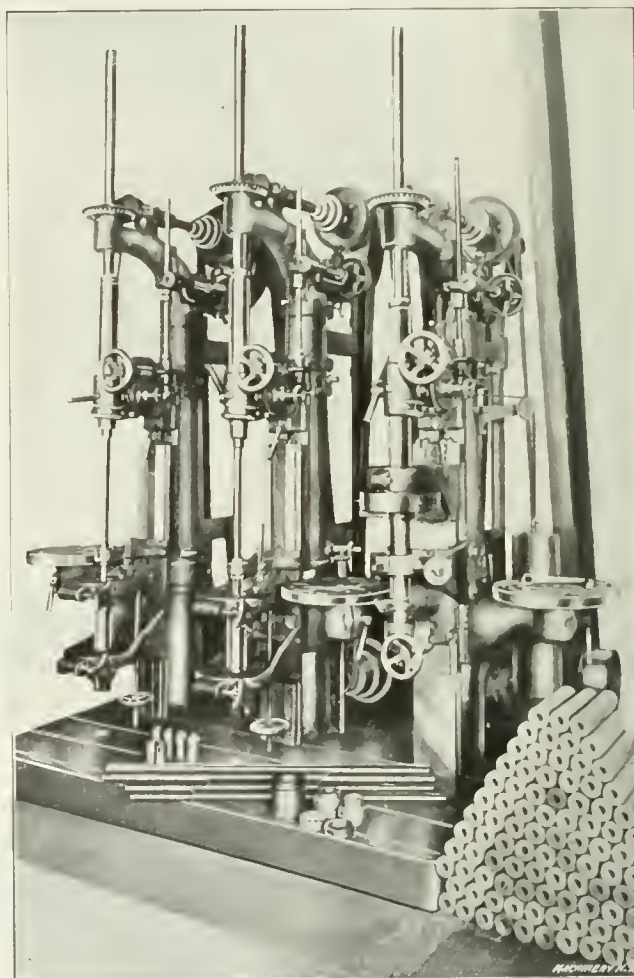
Rockford Drilling Machine arranged for Boring Sleeves
